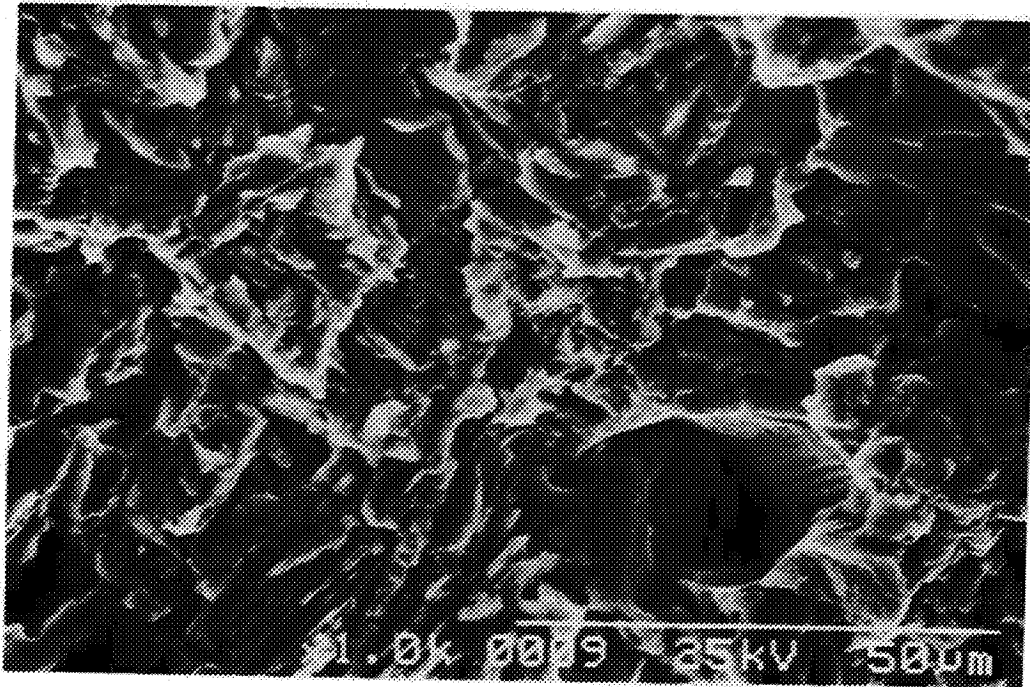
Fracture surface of the Disk specimen with a 10 Hertz haversine fatigue loading wave form (1000X).
